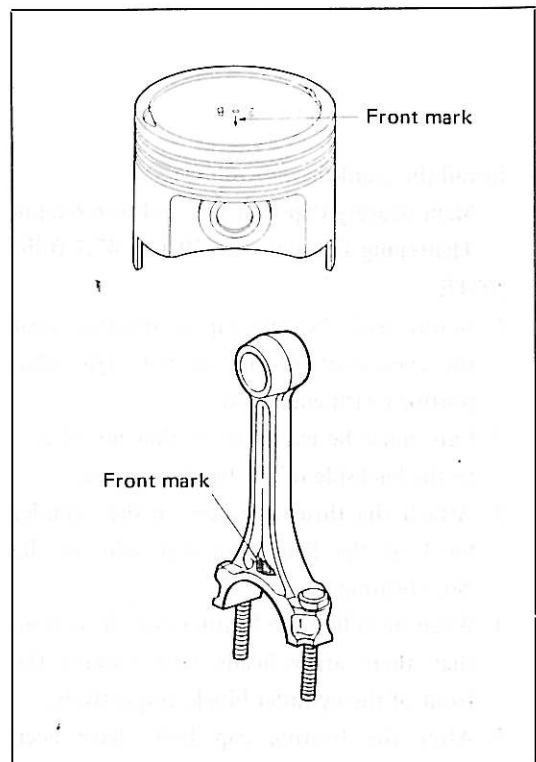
"Front" Marks on Piston and Connecting Rod
